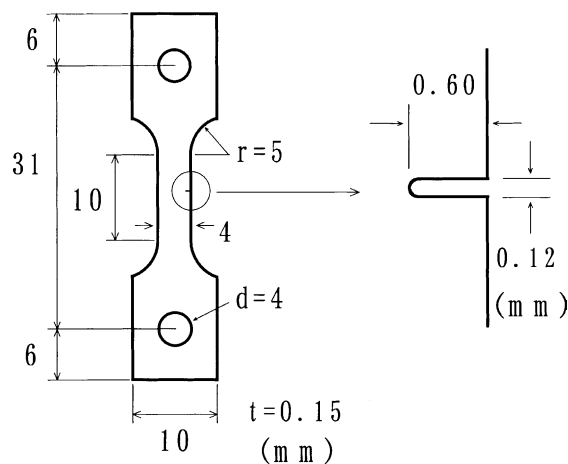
Dimensions of the single side-notched specimen for fatigue tests.
